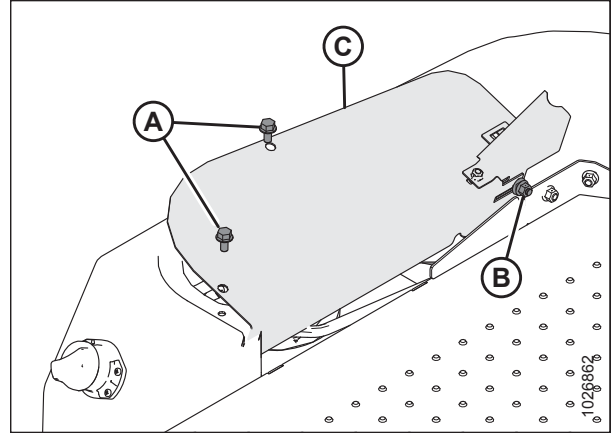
Diesel Exhaust Fluid (DEF) Head Cover
